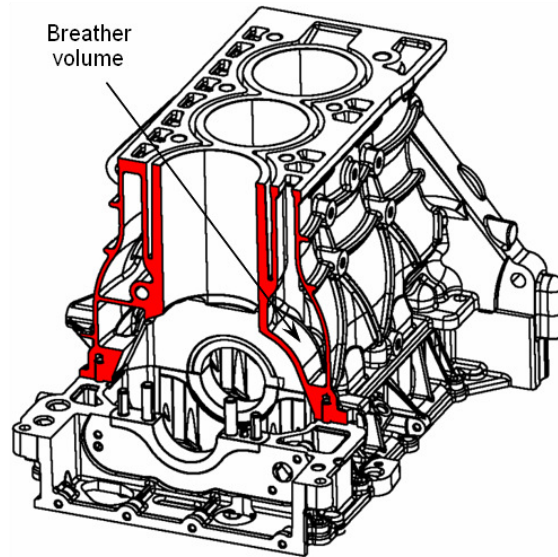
Crankcase construction and inter-bay breather arrangement of the Sabre engine. Also visible are the four vertical bolts for each main bearing panel and associated cast iron insert in the bedplate casting. (Illustration courtesy Lotus Engineering)
